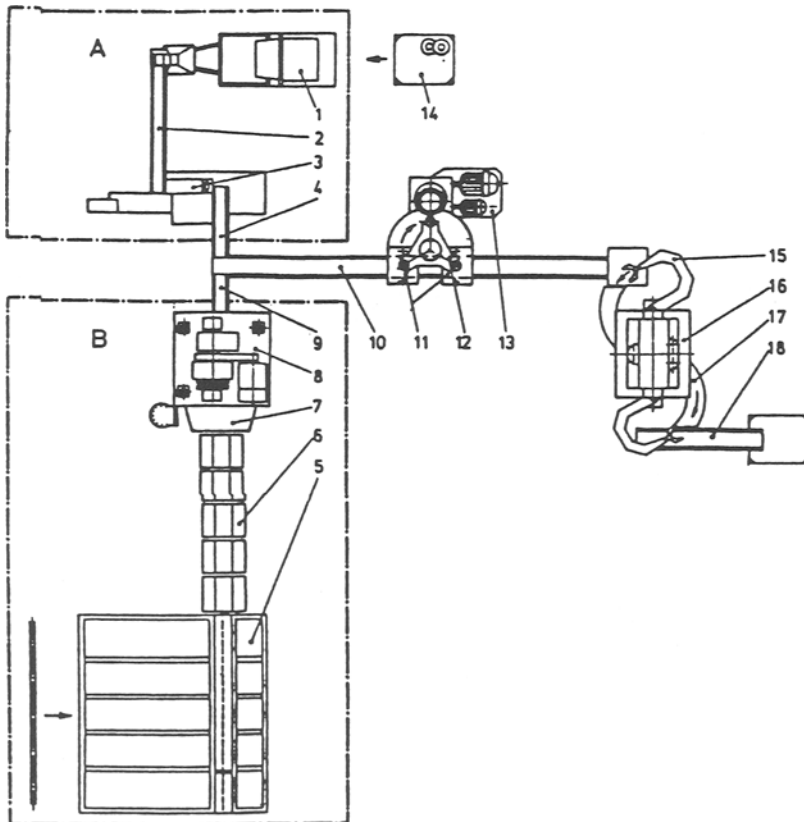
A layout drawing of an automated manufacturing line with AGW125 for the production of ring shaped axially symmetrical automobile parts with and without inner bore on an axial closed-die rolling mill [5, 15]. (1) Unloading of container, (2) Feed to orienting device, (3) Induction heating unit, (4) Chute, (5) Bar rack, (6) Induction heating unit, (7) Hot shear, (8) Die forging press, (9) Transporting system, (10) Conveyor belt, (11) Lifting tables, (12) Mandrel turret of prerolling mill, (13) Prerolling mill, (14) Container with forged blank from rapid forging press, (15) Loading manipulator, (16) Axial closed die rolling mill, (17) Unloading manipulator, and (18) Conveyor belt.
